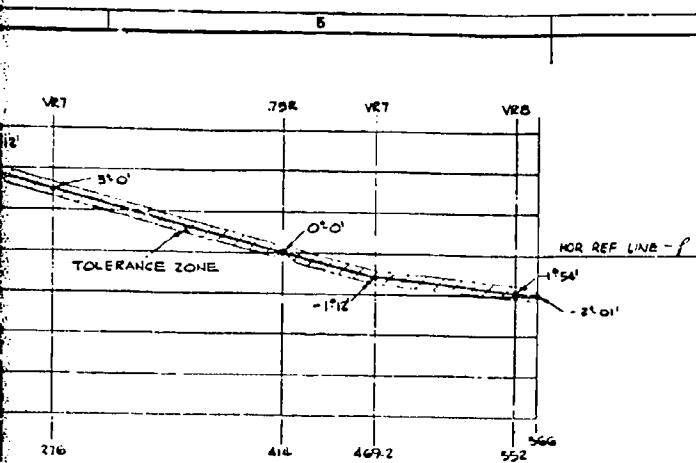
Spar Assembly for Two Pin, Fittingless HLH Rotor Blade
